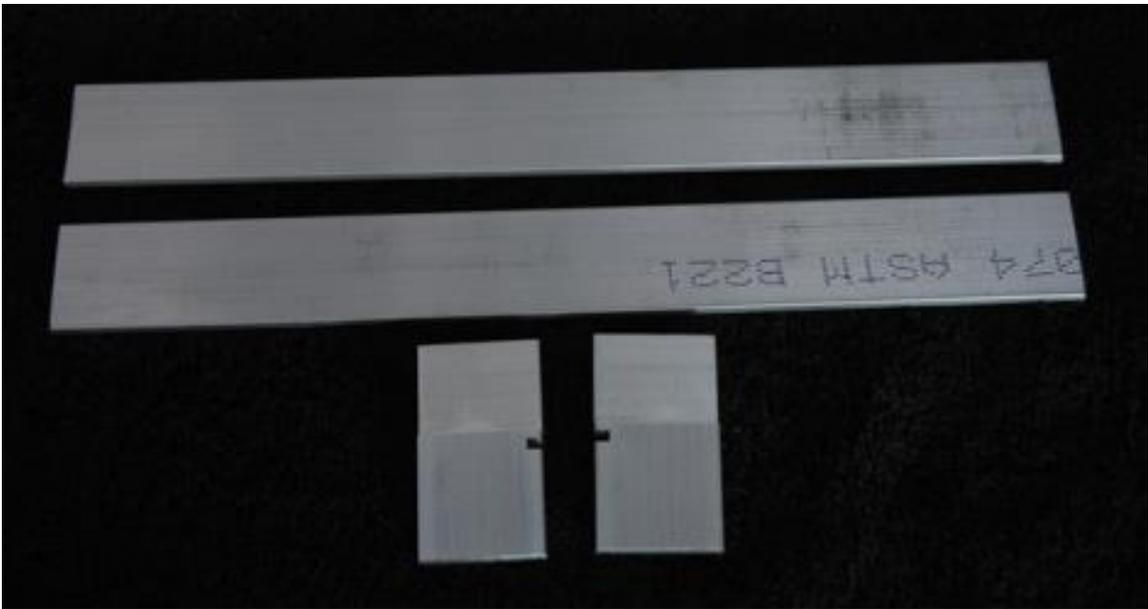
, 1/8" bars and cross pieces before assembly. Note slots for hinge pin alignment
